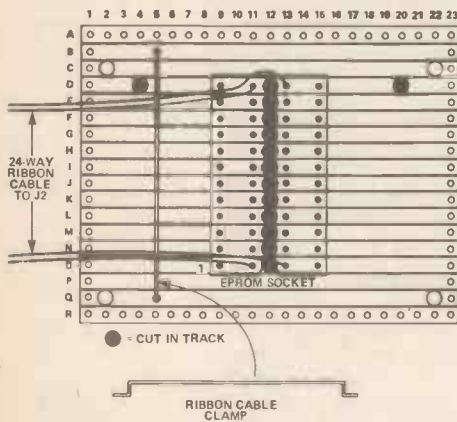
The ZIF socket (or low-cost 24-pin IC socket) is mounted on a small piece of Veroboard and bolted to the front panel (the track cuts prevent the mounting nuts shorting the socket pins to the chassis).
